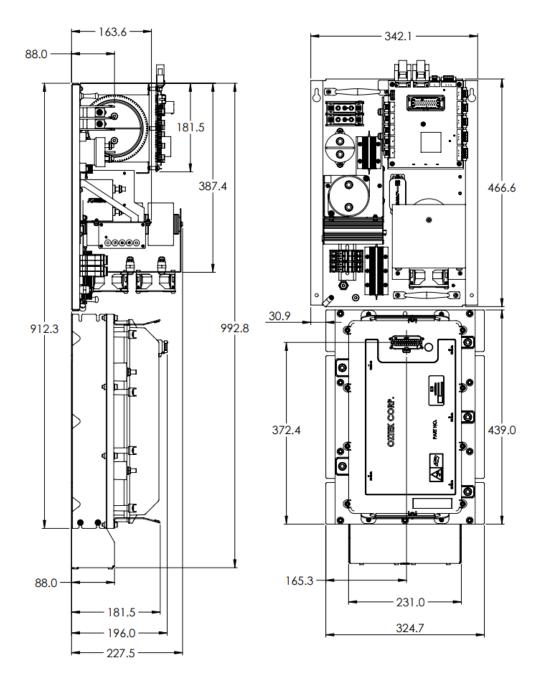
11445-03 Product Dimensions (in millimeters)
